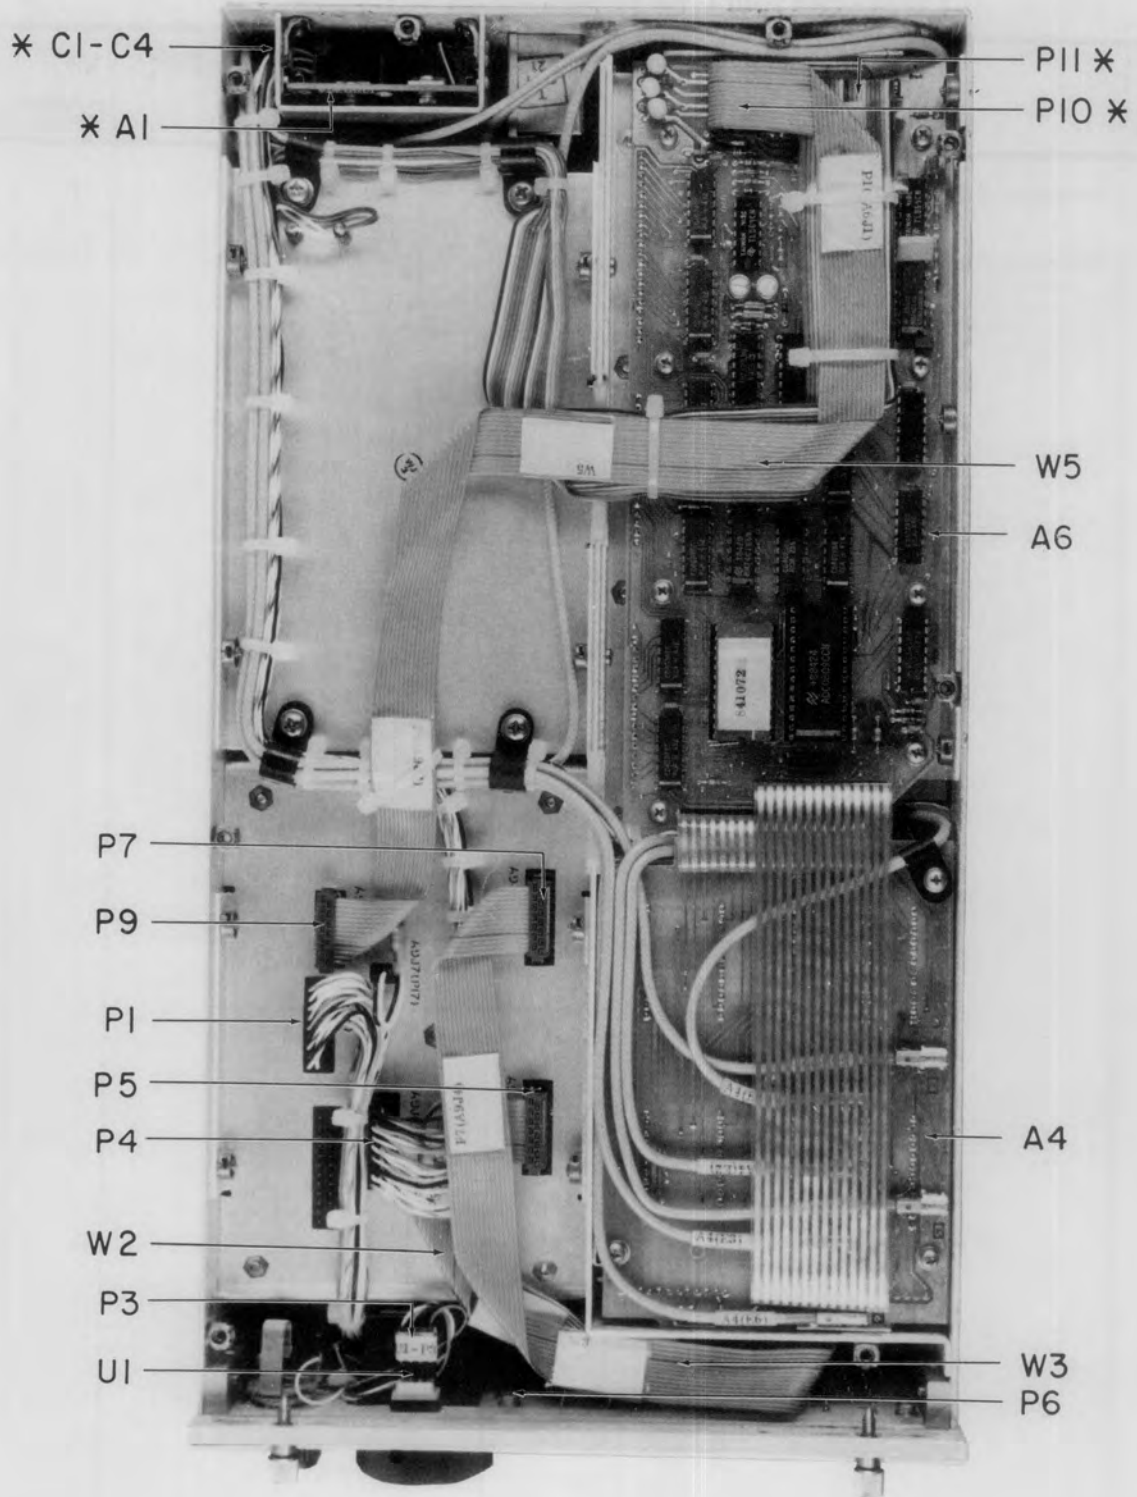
WJ-8626A-4 HF Receiver, Bottom View, Location of Components
